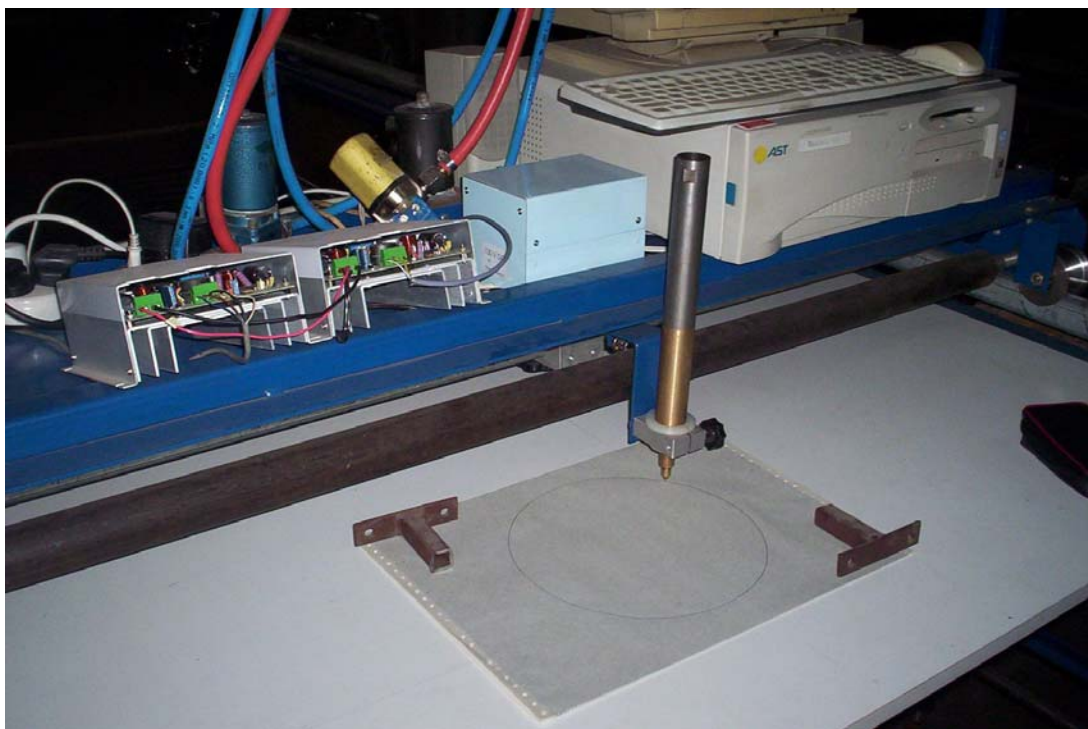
Right view of the CNC machine system for the mechanized oxygas cutting
